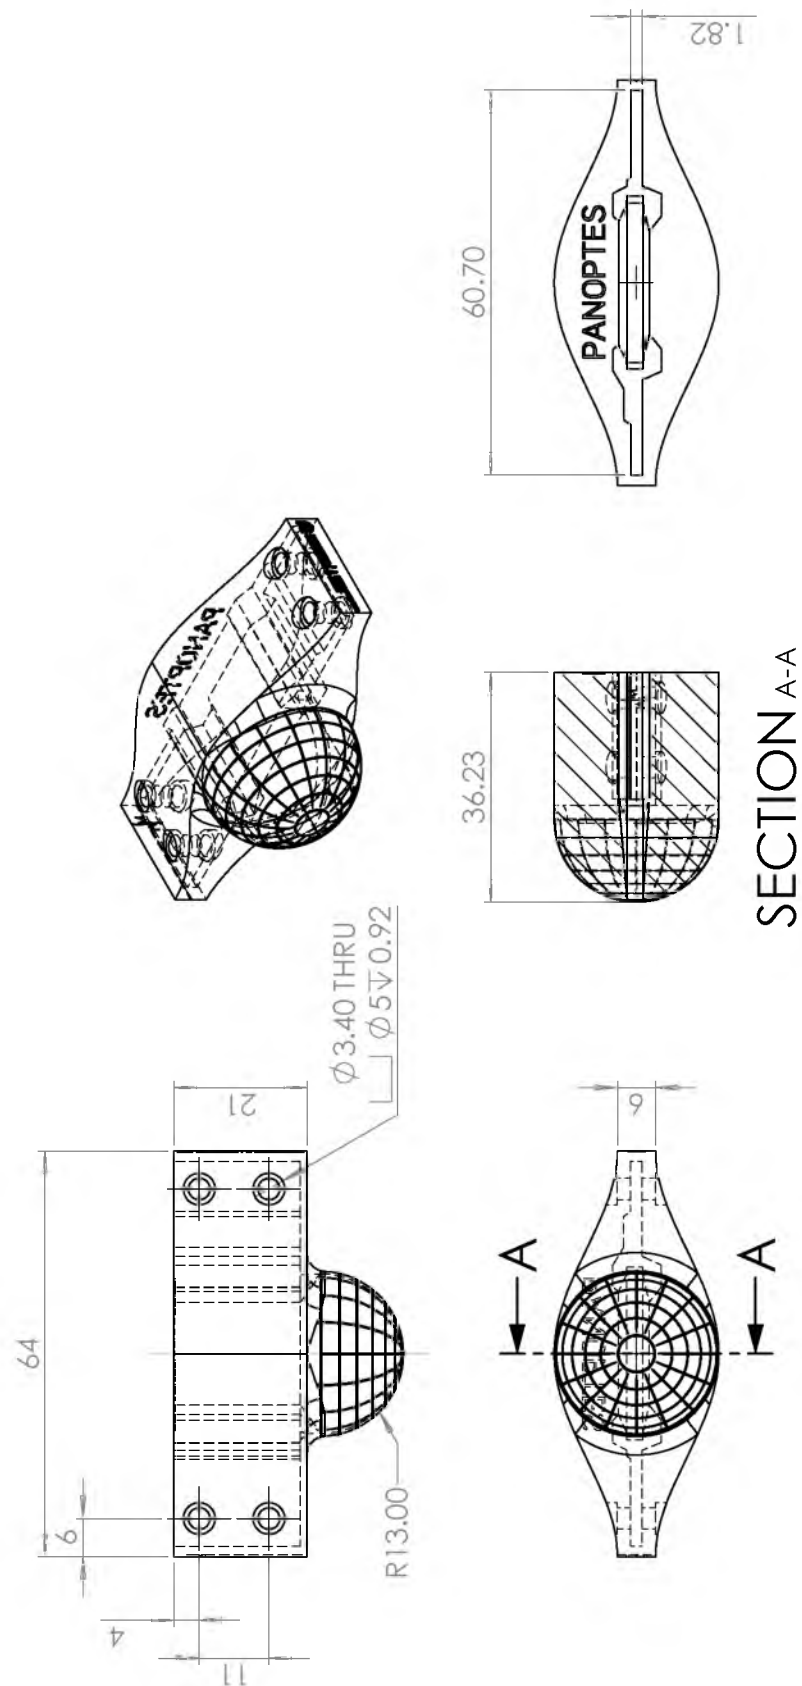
Dimensioned drawing of the phantom 3D printed for the cut version of the semicircular detector. Dimensions are in millimetres.
